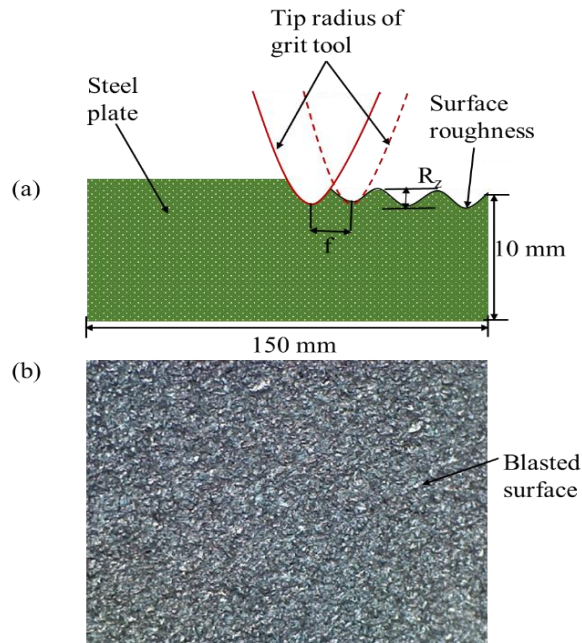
(a) Schematic of surface preparation by grit tool, (b) Typical surface prepared through abrasive blasting (Sa2.5)
